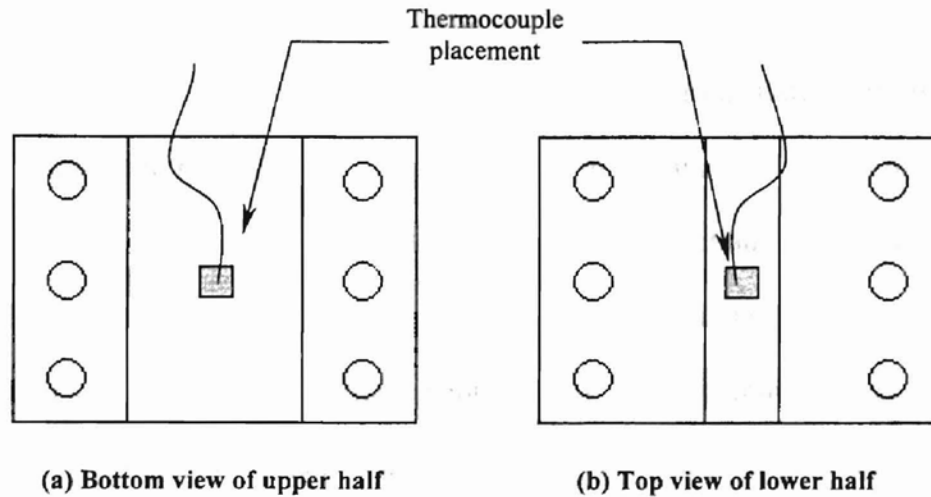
Thermocouple placement on heating surfaces of first curing fixture
